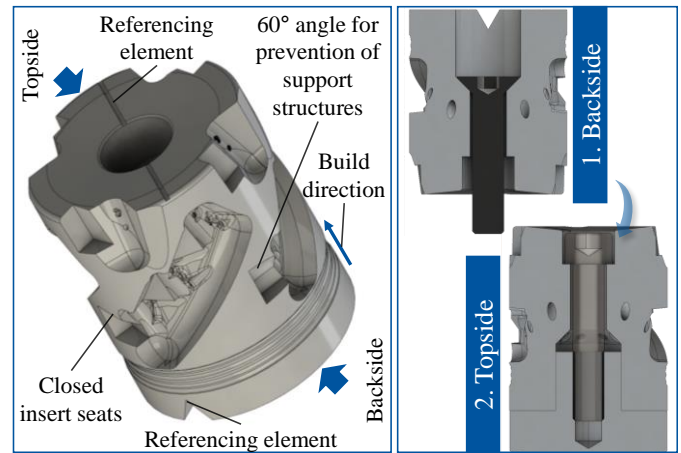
As-built PBF-LB tool and clamping positions for post-processing
